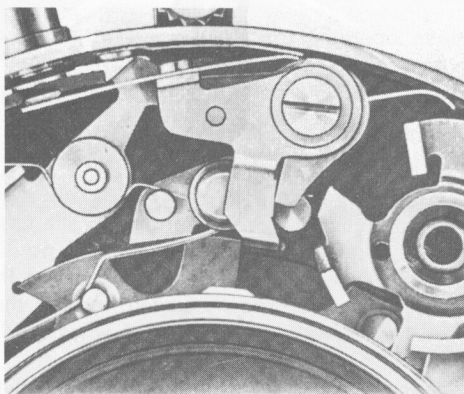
SYNC DRIVE SECTOR REMOVED FOR CLARITY
